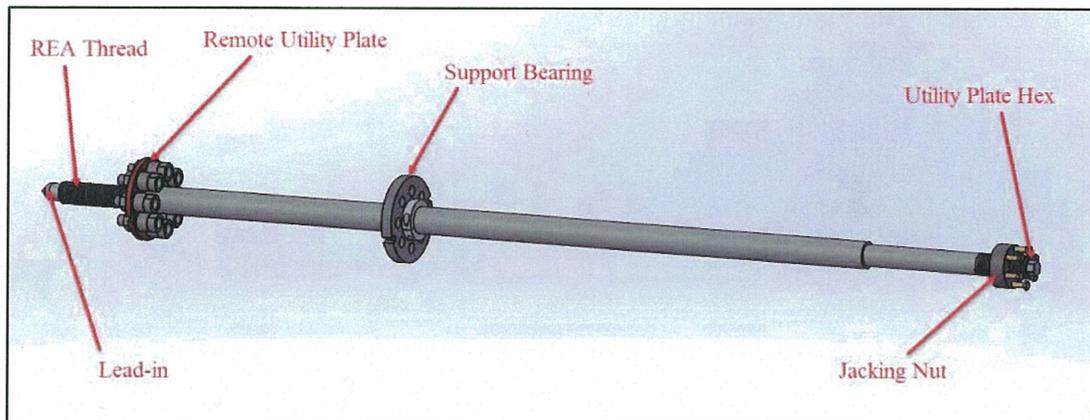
REA Bolt Assembly (without hydraulic lines)
